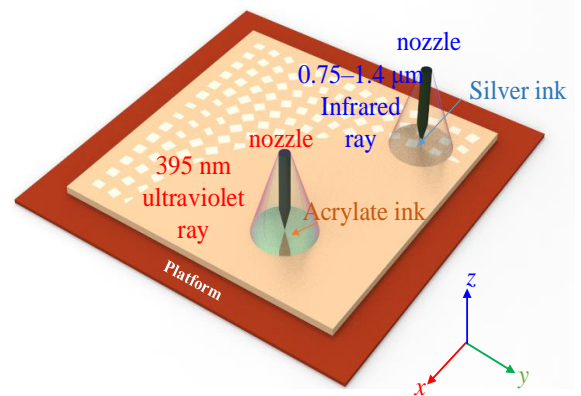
The sample under fabrication using multi-materials-integrated 3-D printing technique.
